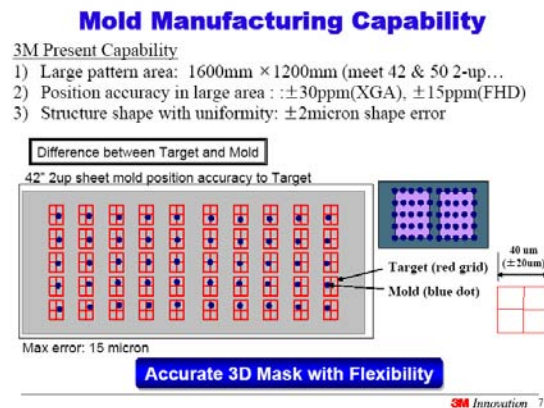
42" 2-up Sheet Mold - Typical Metrology
